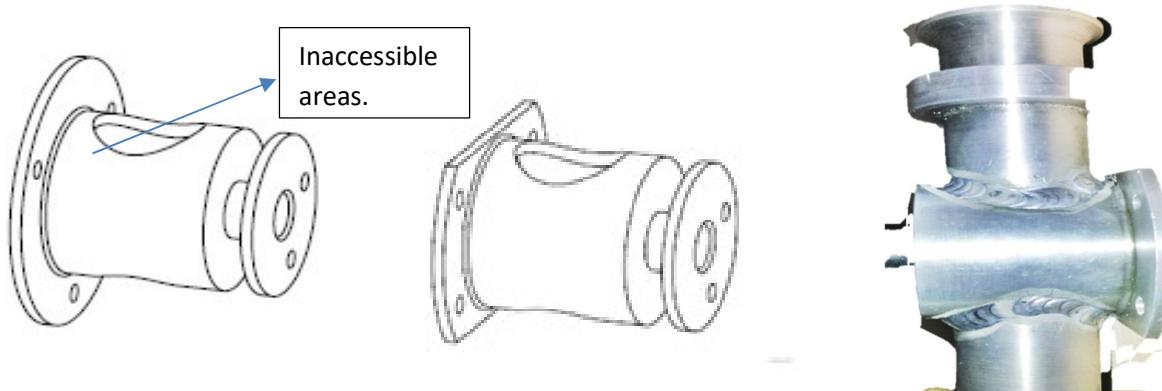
The original design v/s modified design of the outer barrel to allow accessibility of the welding torch.
